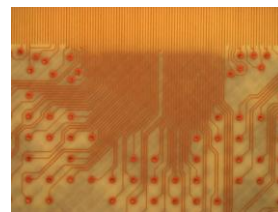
Top view of multilayer PCB with 40 μm wide traces and microvias
